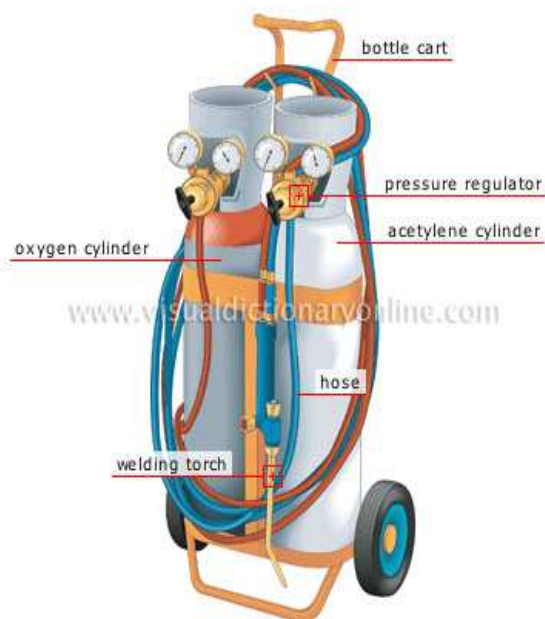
Principle of oxy acetylene welding (visual.merriam-webster dictionary, 2012)
